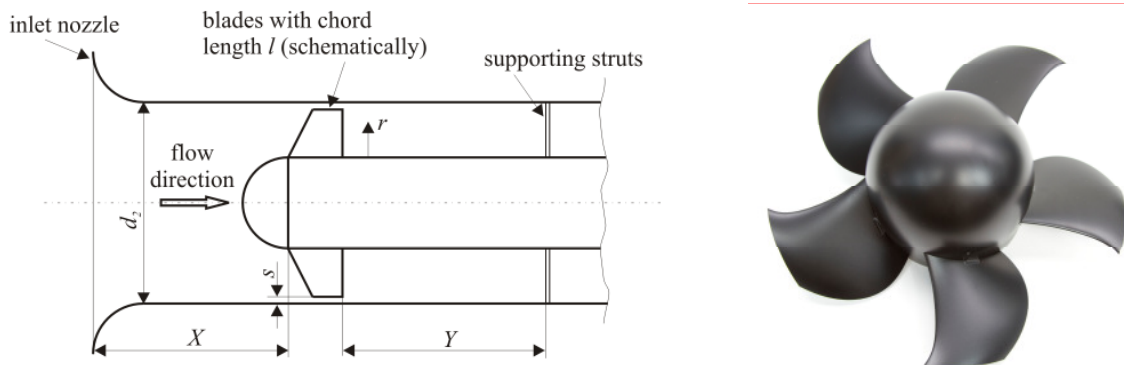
Axial fan unit investigated (left; to scale; $X = 290$ mm, $Y = 300$ mm) and topview of the impeller
